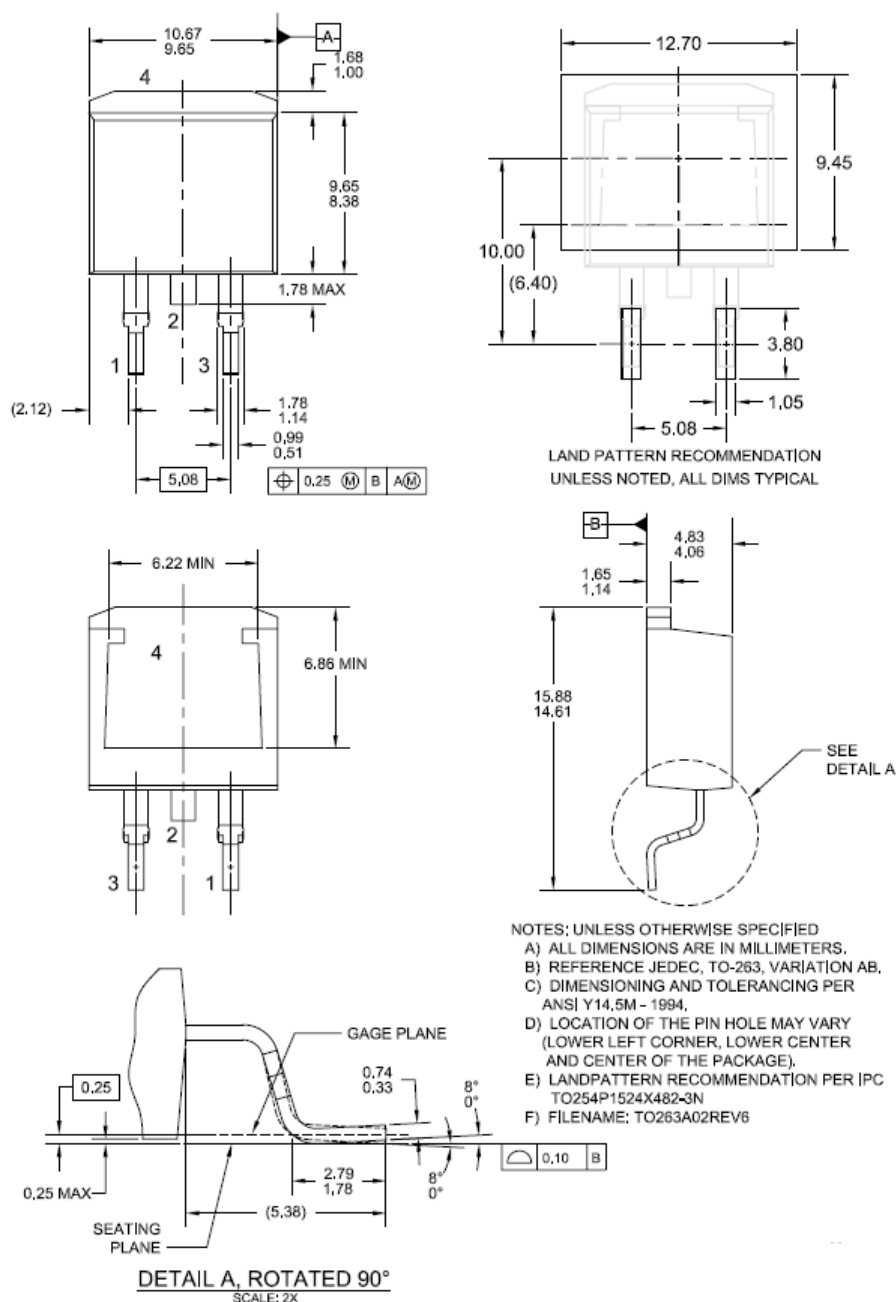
TO-263 2L (D2PAK) - 2LD, TO263, SURFACE MOUNT
